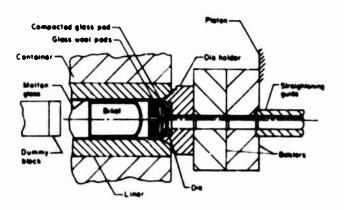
HOT EXTRUSION SETUP USING GLASS LUBRICATION (1)
